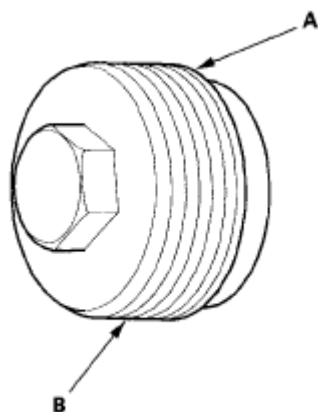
Identifying Rack Guide Screw Locknut, Locknut Wrench & Rack Guide Screw
